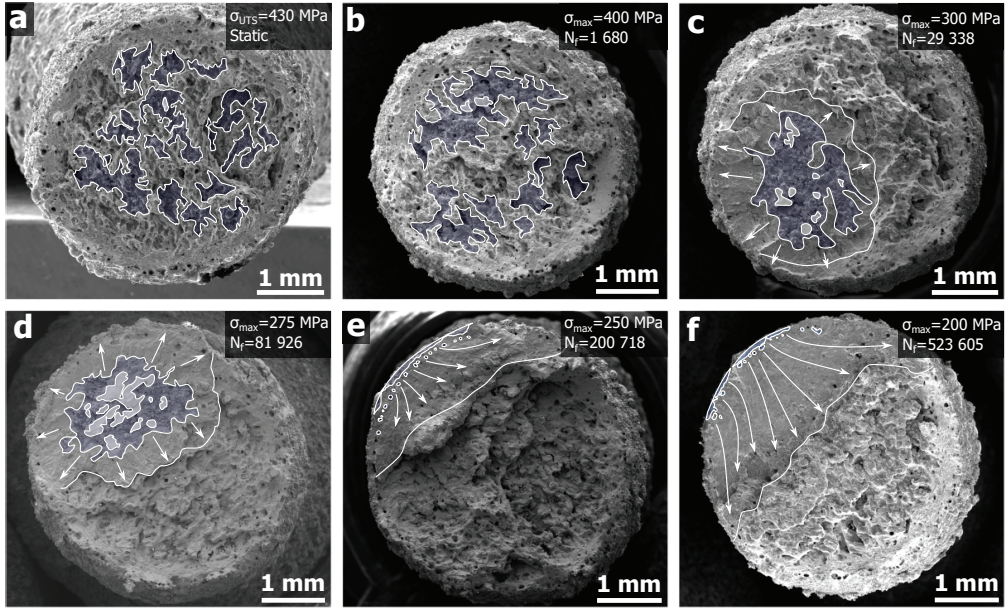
Fracture surfaces for AM 316L steel ranging from QS (a) to HCF loading (f).
